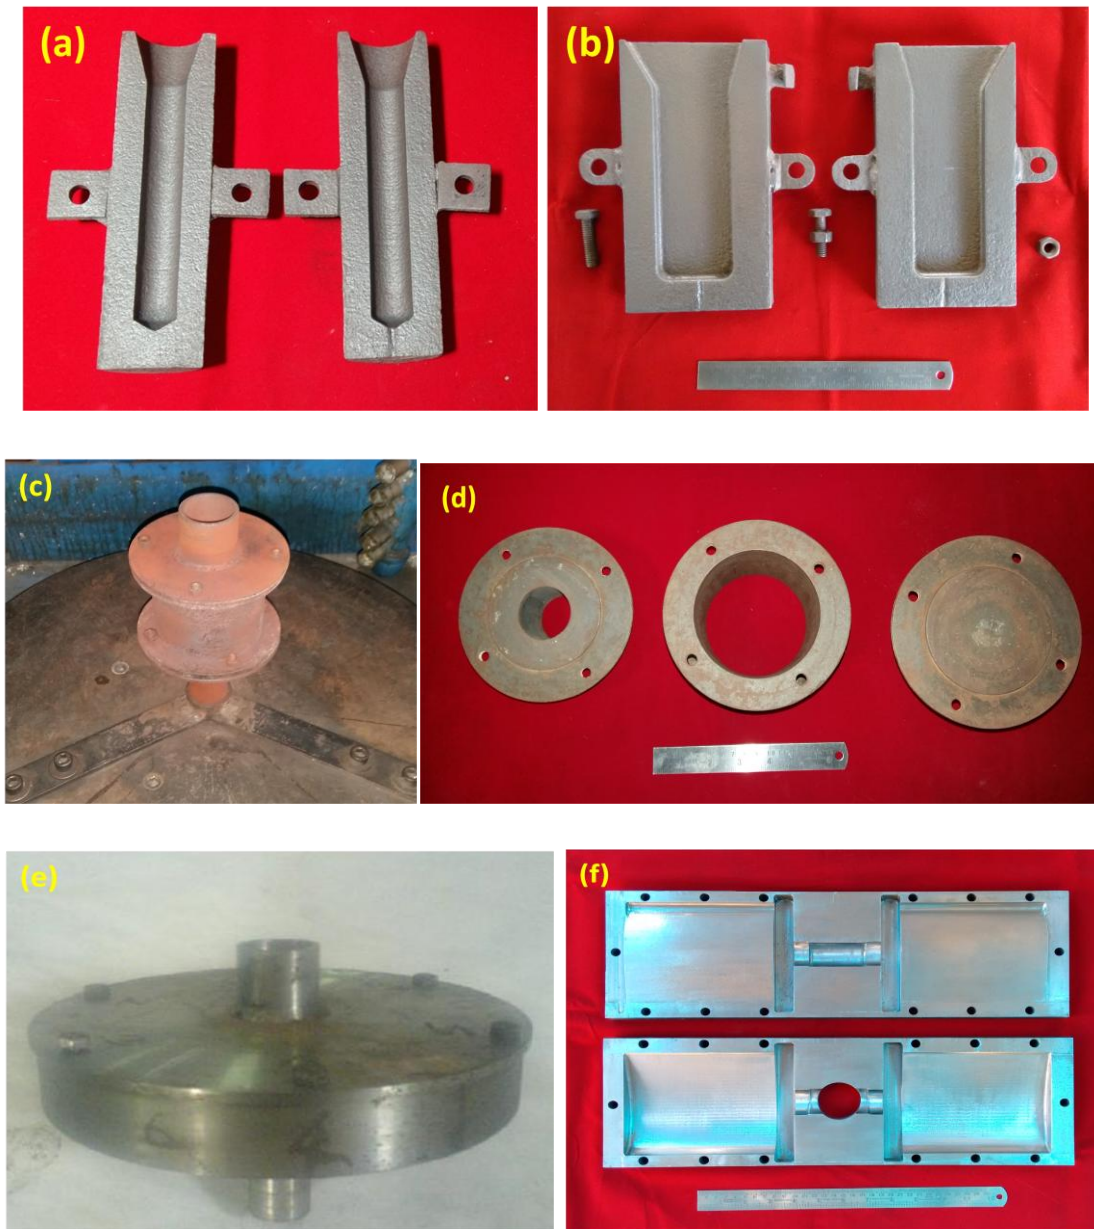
Permanent moulds used in the fabrication of aluminium alloys and composites in both gravity and centrifugal casting (a) pencil mould (b) slab mould (c) cylindrical mould for cylinder application (d) cylindrical mould for the fabrication of polymer FGM (e) ring/disc mould (f) turbine fan blade for centrifugal casting
